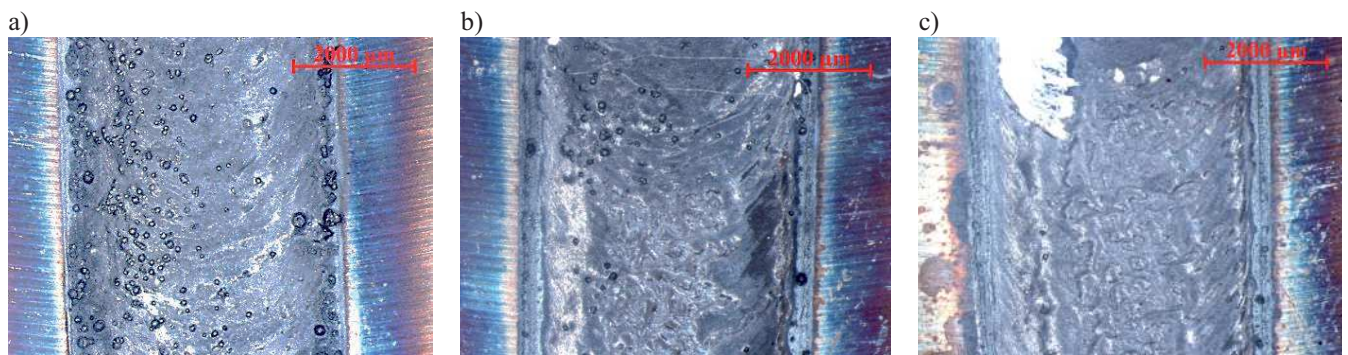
Shape of the laser tray of the X40CrMoV5-1 steel cladded with Inconel 625 powder, laser power: a) 2 kW, b) 2.5 kW, c) 3.0 kW
